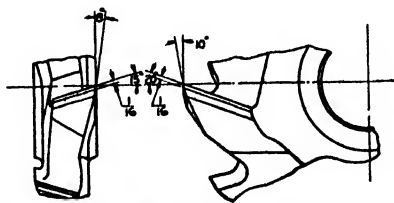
Staggered tooth cutter—recommended design of tooth.
